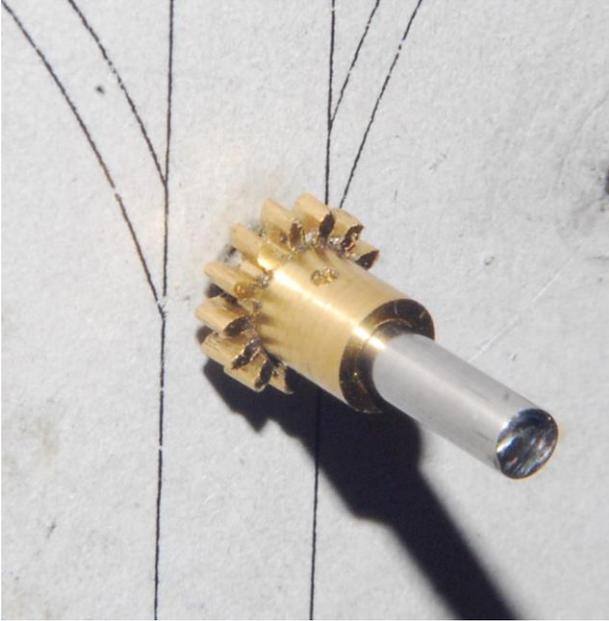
Drive pinion temporarily installed on the 3rd wheel arbor. The arbor will be trimmed to length after the pin location has been marked and drilled.
